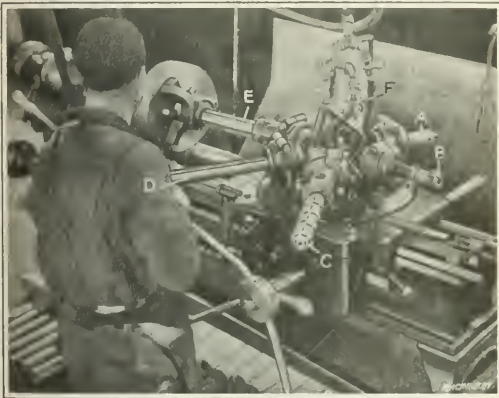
Boring, counterboring and reaming Cavity of Russian High-explosive Shell
